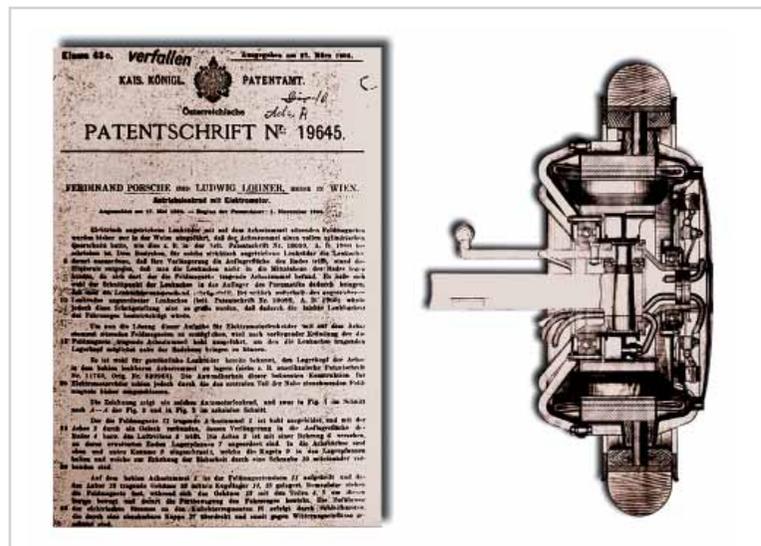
Patent specification and design of F. Porsche’s wheel hub motor [1]
